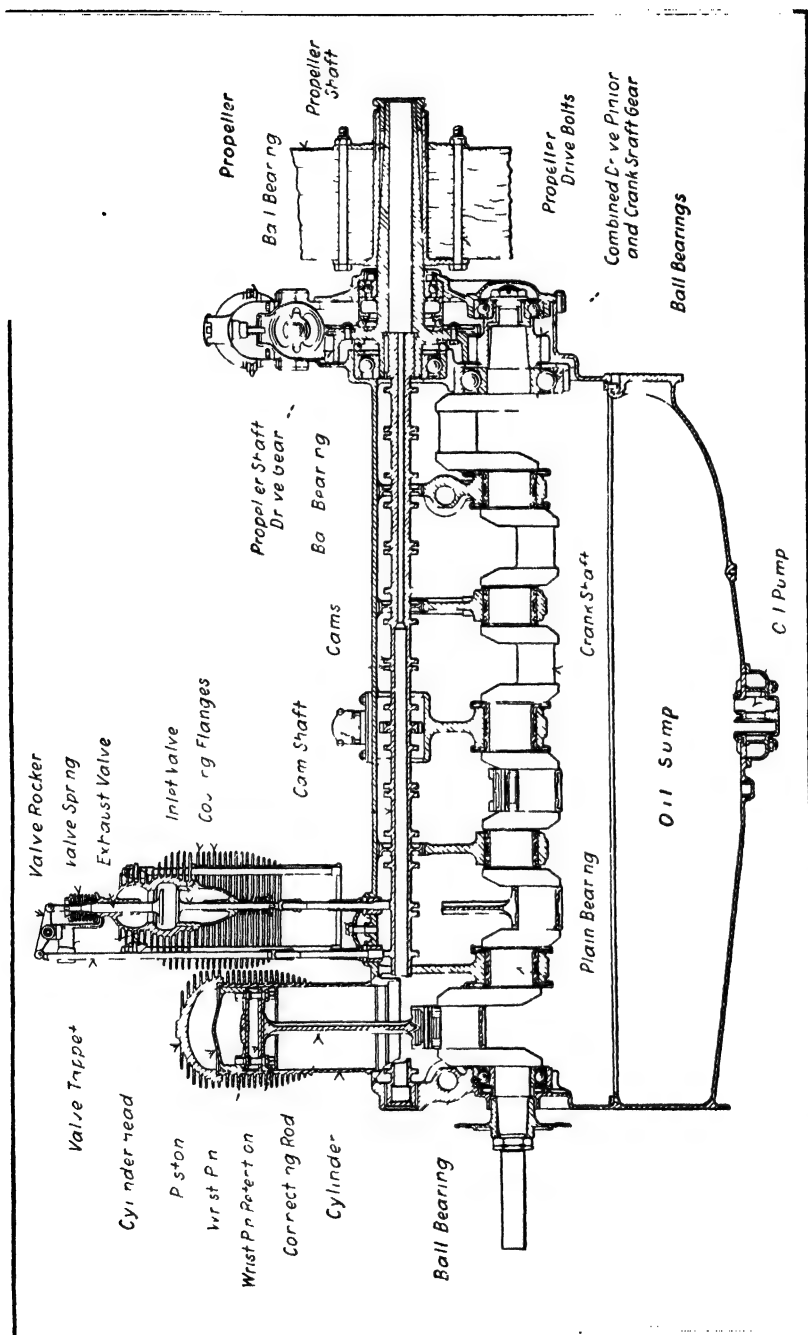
Side Sectional View of Renault Twelve-Cylinder Air-Cooled Aviation Engine Crankcase Showing the Use of Plain and Ball Bearings for Crankshaft Support.
